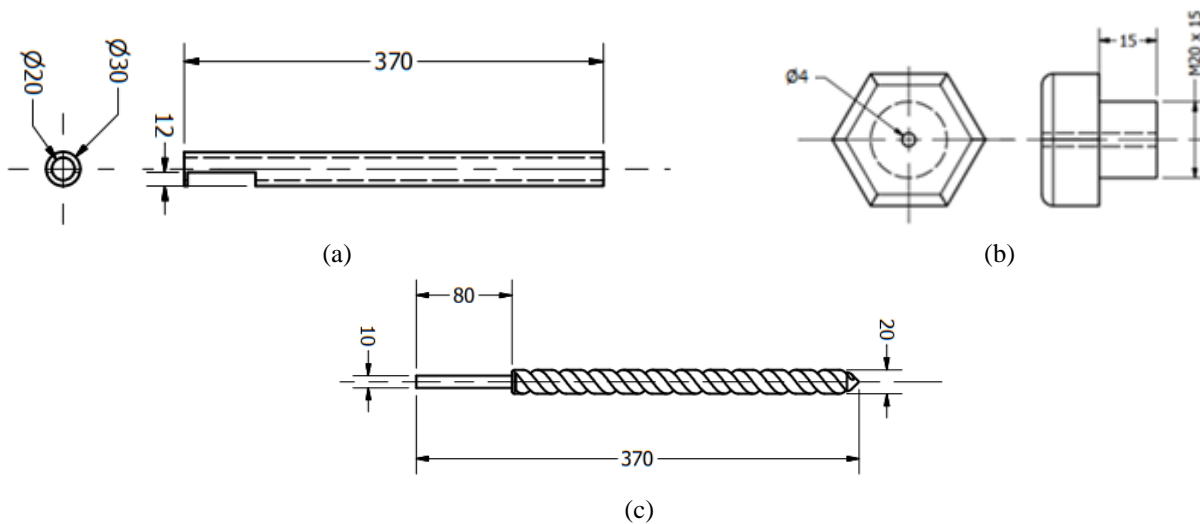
Design of (a) barrel (b) screw (c) nozzle
